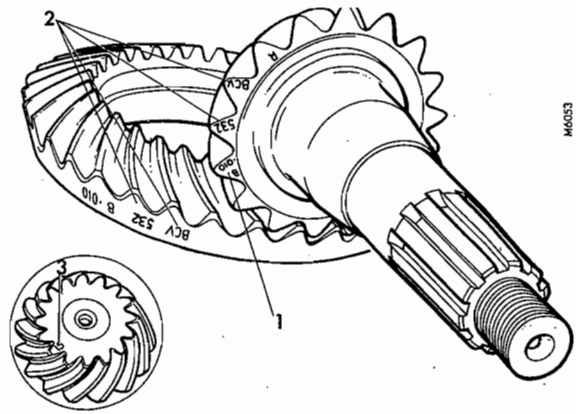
CROWN WHEEL AND PINION MARKINGS
